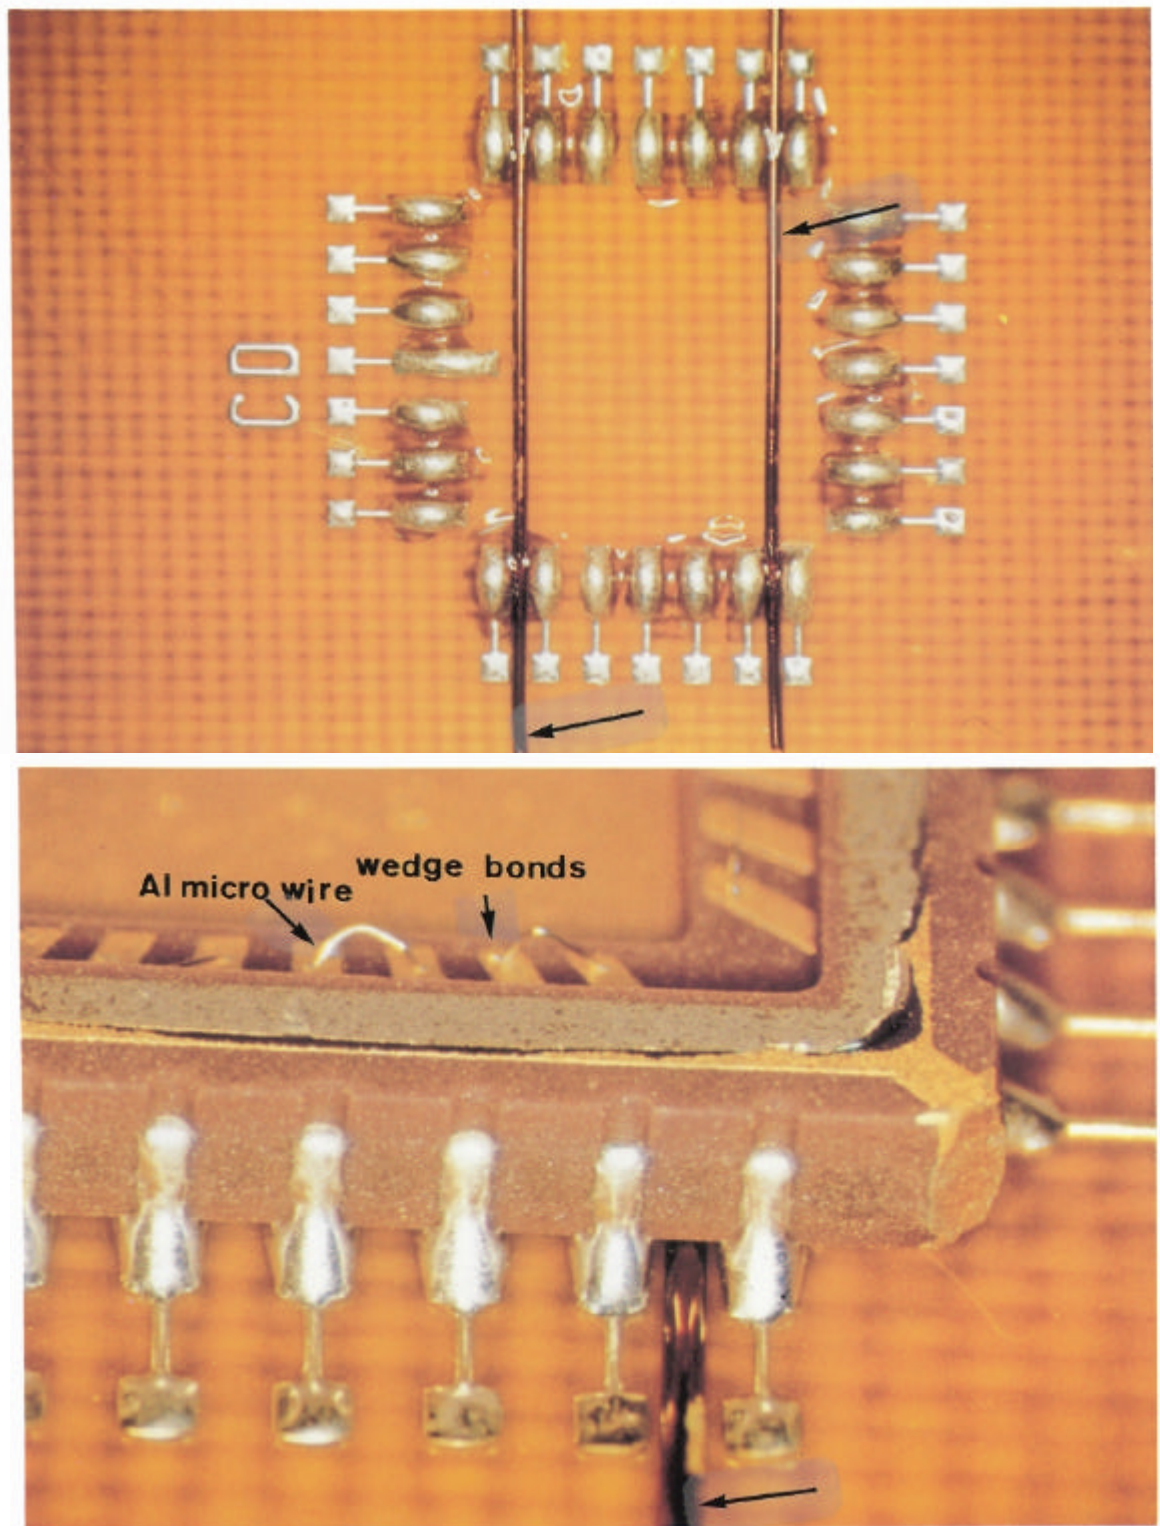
Close-up view of enamel wires used to maintain a constant stand-off height of 0.3 mm. Photograph of Specimen 2 shows the solder joint castellations immediately after vapour-phase soldering and cleaning
